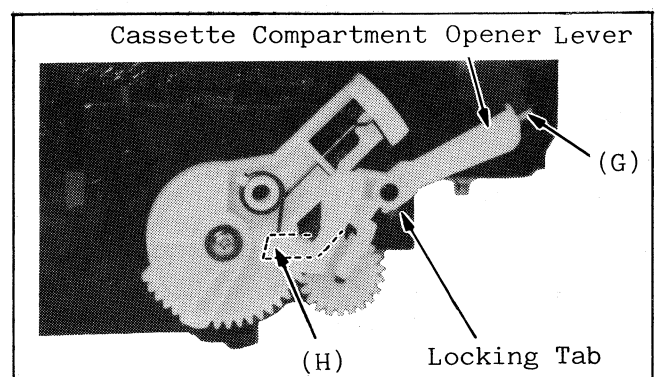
Adjustment of Cassette Up Gears-(10)
